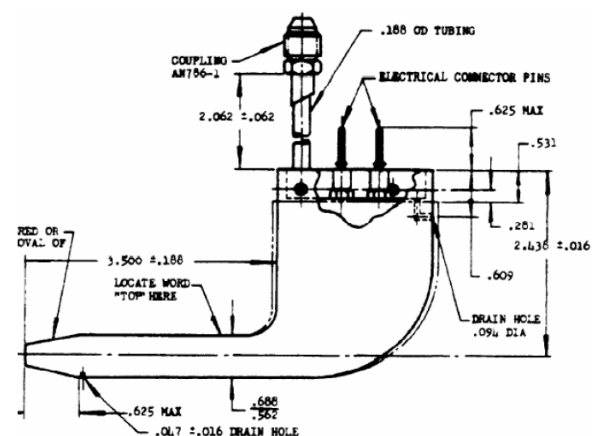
b. Technical drawing of the Pitot tube (source: Aero Instruments Co., USA)
